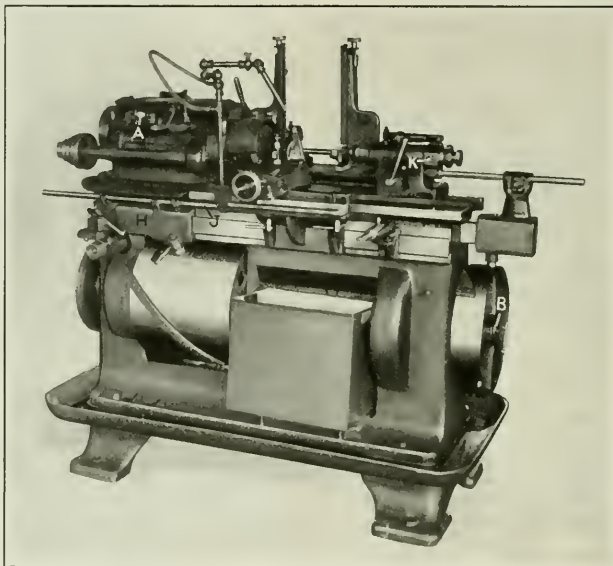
Geared-head Automatic Lathe developed by the Pratt & Whitney Co.
